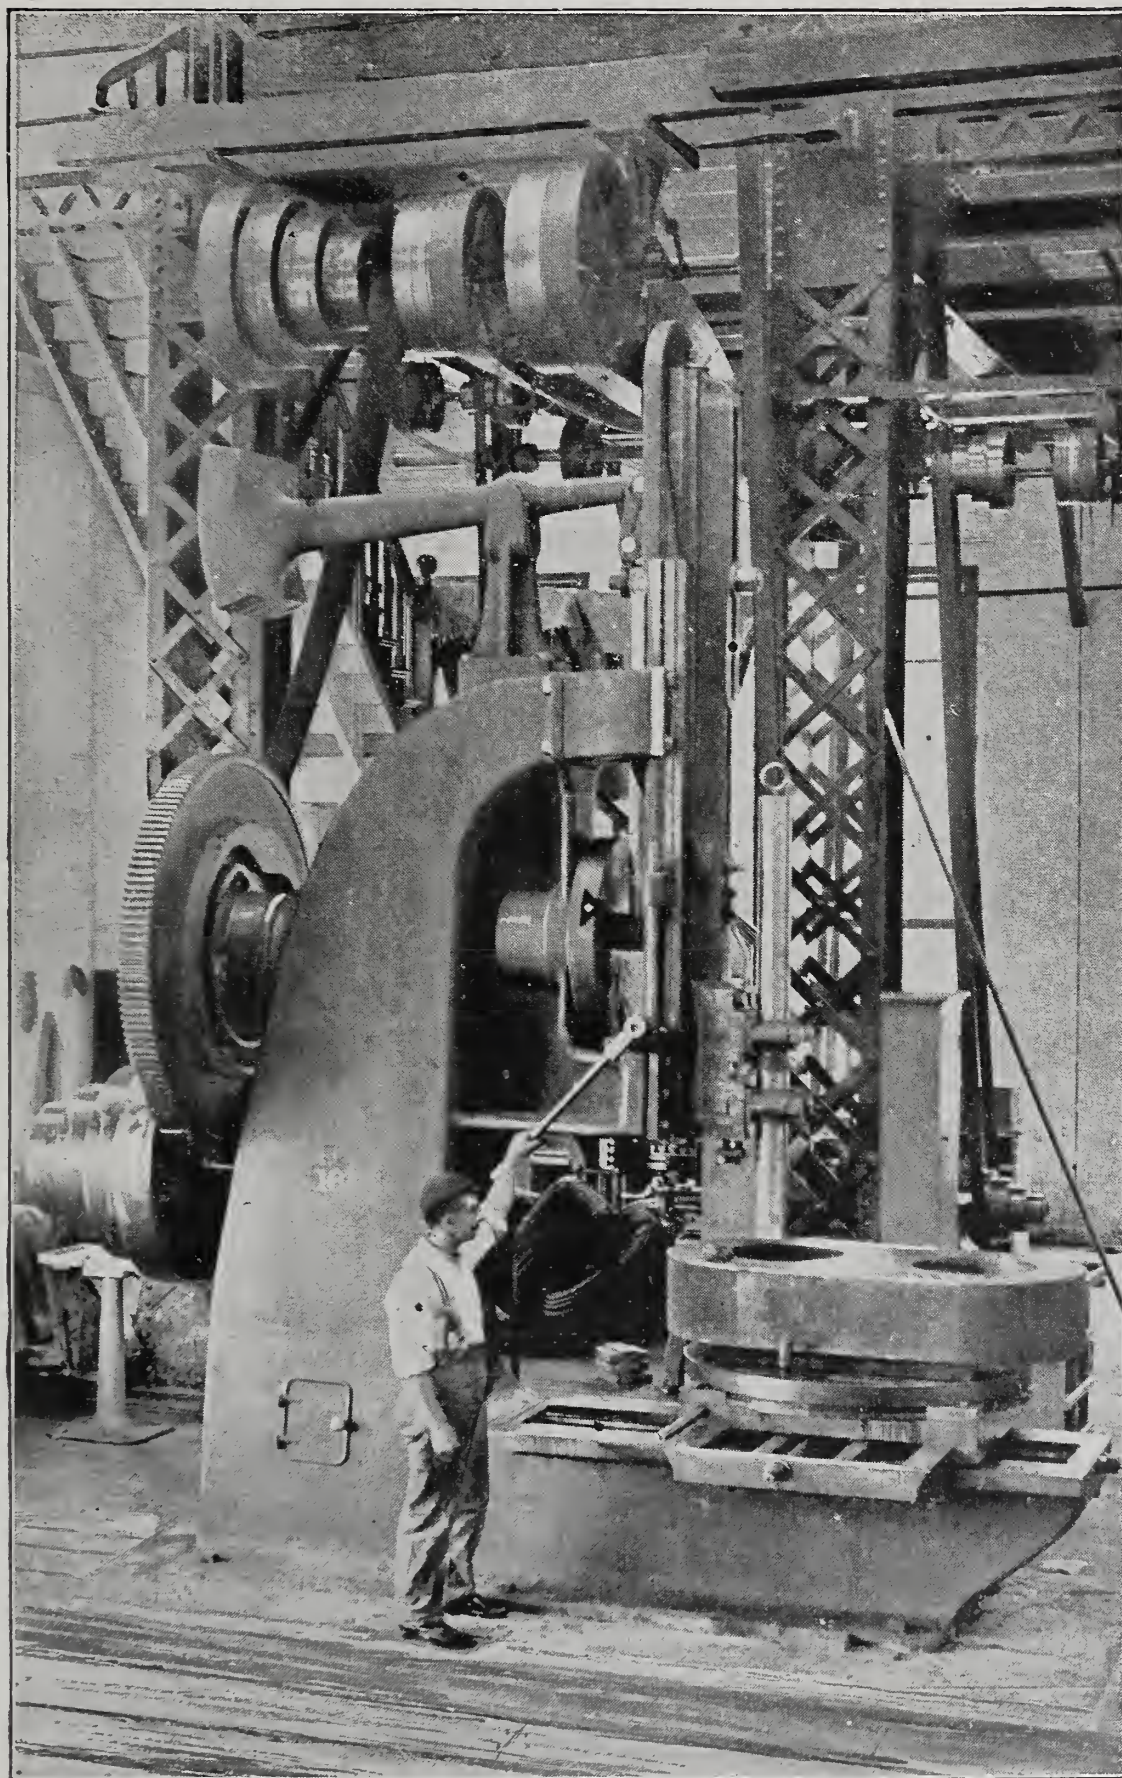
24-INCH SLOTTING MACHINE, MANUFACTURED BY BEMENT, MILES & CO., PHILADELPHIA, PA.
